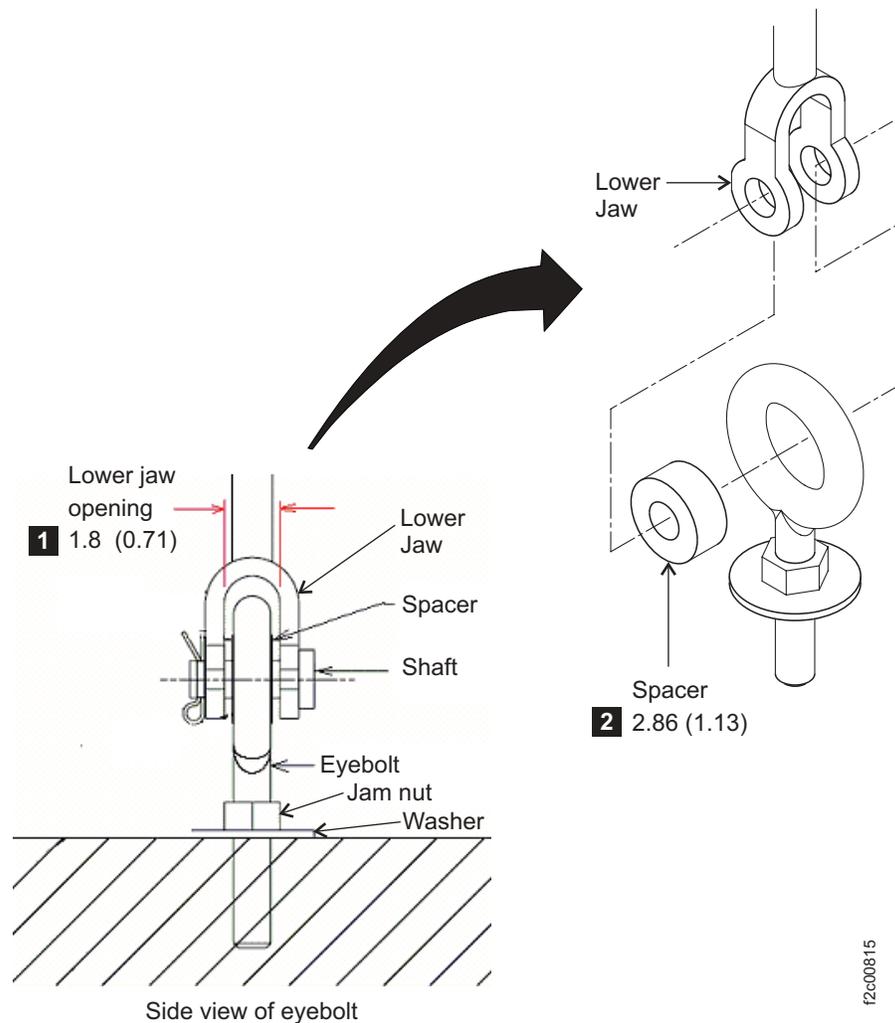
Eyebolt required dimensions. Dimensions are in millimeters (inches).
